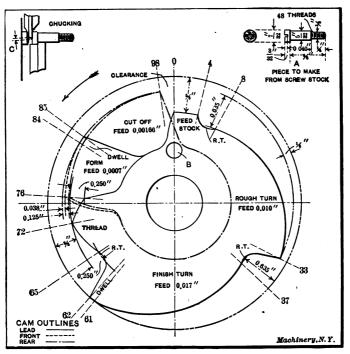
Turret and Cross-slide Cams for Making a Steel Screw
